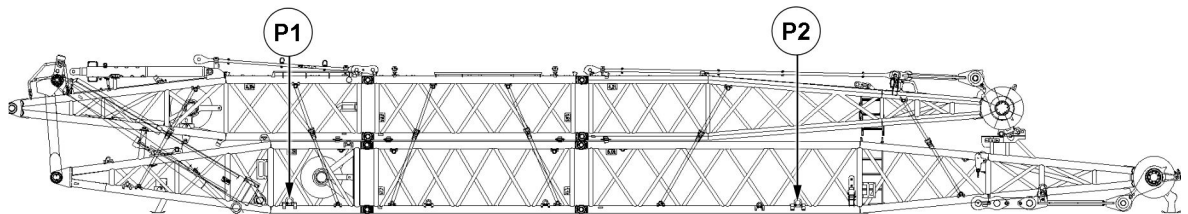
WA-frame 1 pivot section with WA-frame 1 intermediate section 4 m WA-frame 1 end section and WA-frame 2 pivot section with WA-frame 2 intermediate section 4 m , WA-frame 2 end section unit fastening points
